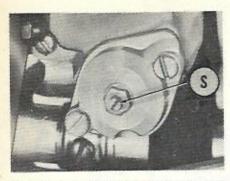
View of "Lube-Assist" assembly installed showing location of adjusting screw (S). Unit is located in oil tank cover on direct drive saws or at left lower side of gearbox housing on gear drive models.
